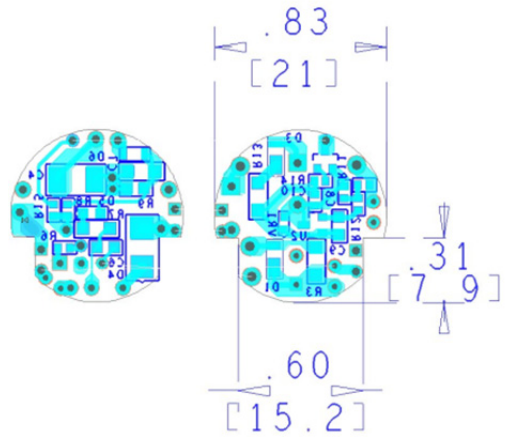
Buck-Boost Boards Board A and Board B Layout and Outline, Bottom Side.
